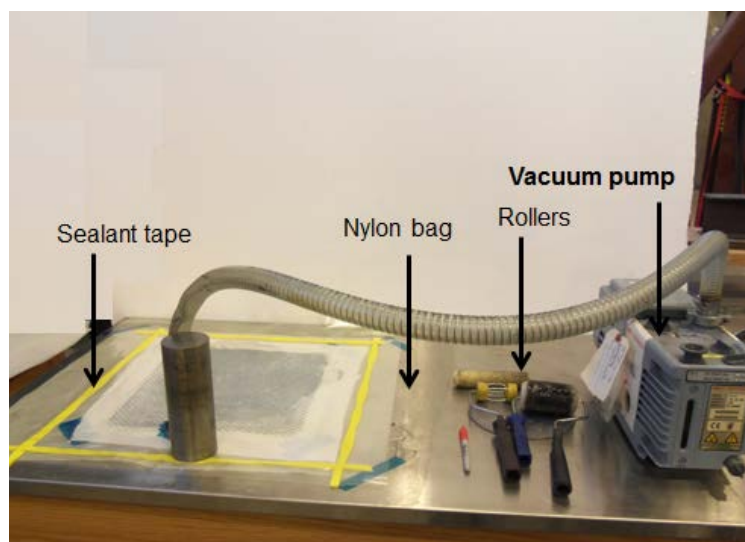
GFRP fabrication using vacuum hand lay-up technique.
